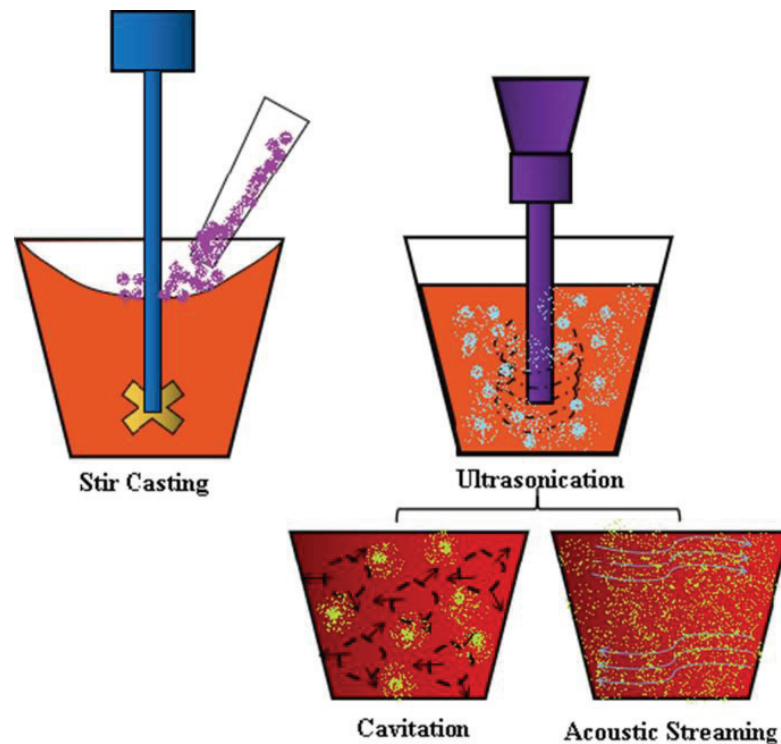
Schematic view of stir casting process and ultrasonic stir ⁴⁹.
